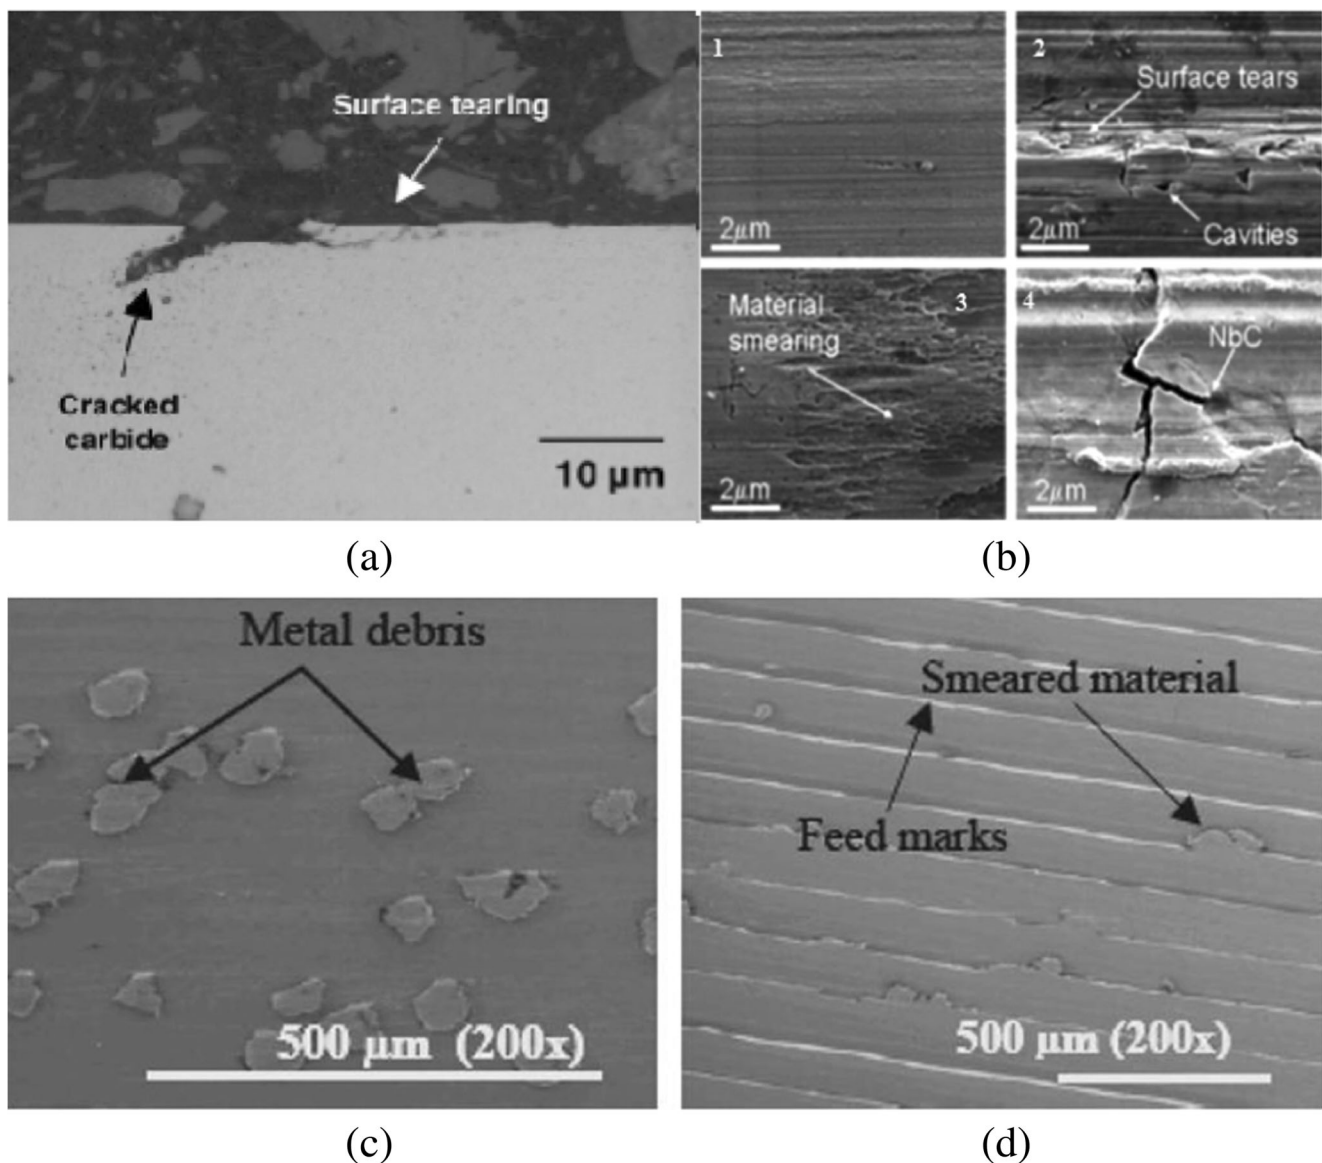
Surface defects induced during machining of Inconel 718 (a) cracked carbide and surface tearing, WC tool [12]; (b) $f=0.15$ mm/rev and $a_p=0.25$ mm (1) $V_c=90$ m/min, WC tool, (2) $V_c=90$ m/min, WC tool, (3) $V_c=300$ m/min, CBN tool, (4) $V_c=300$ m/min, CBN tool [139];
